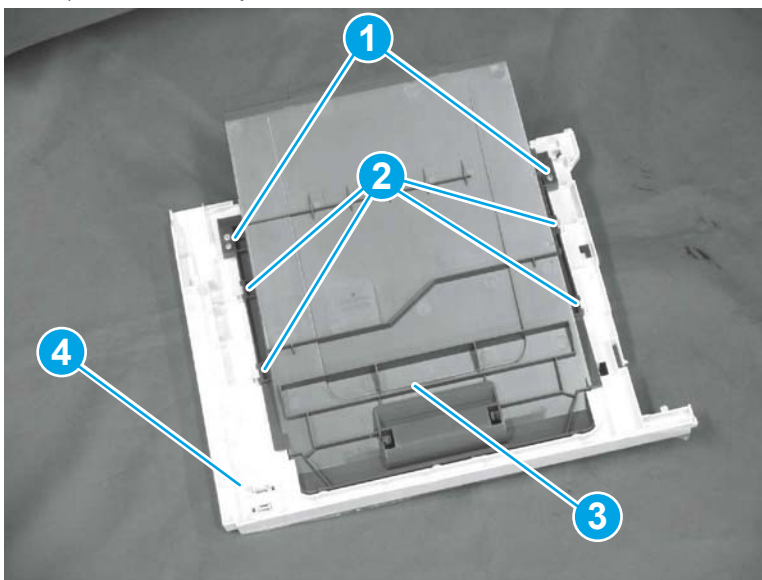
Release one tab and then remove the top cover and face-down tray assemblies
